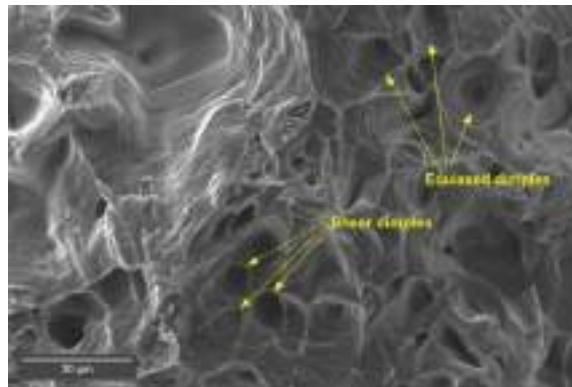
Fracture surface showing a mixture of equiaxed and shear dimples, indicating a non-uniform stress distribution.
